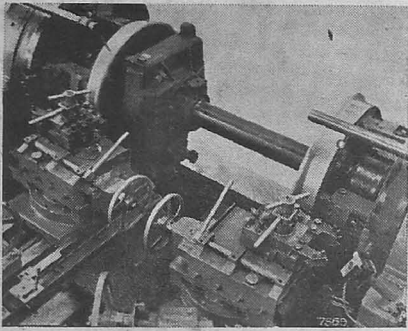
4'-0" Face plate C & W wheel lathe of craven make with turret type tool rests.
